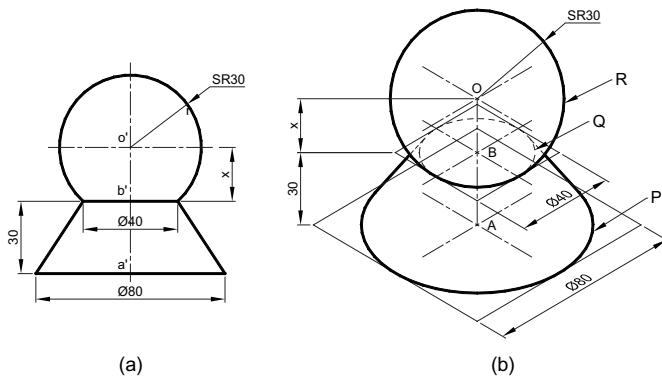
Paper weight (a) Front view (b) Isometric projection
